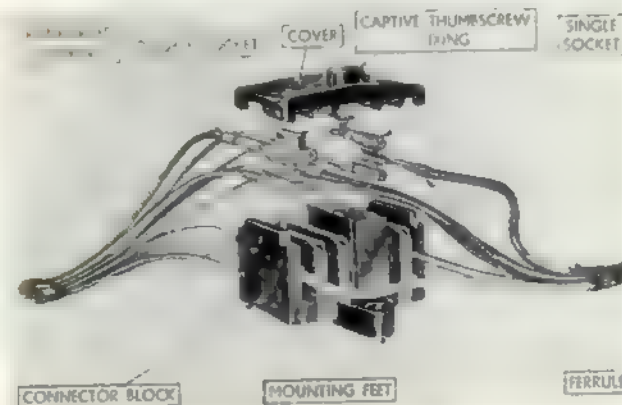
Exploded view of Avro light-weight terminal block.
